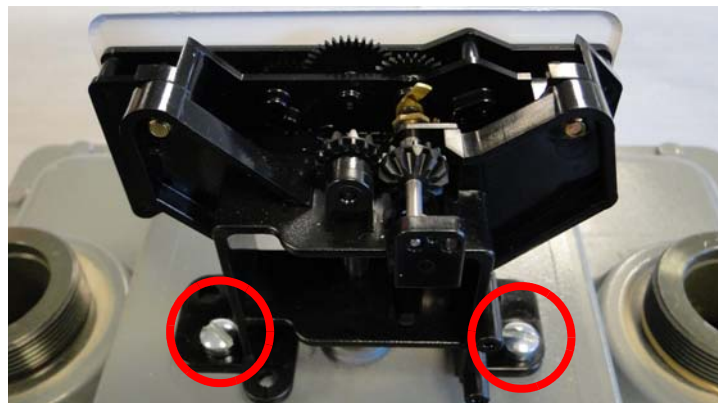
5. Rear View of Supported Index Mounting Bracket Assembly
